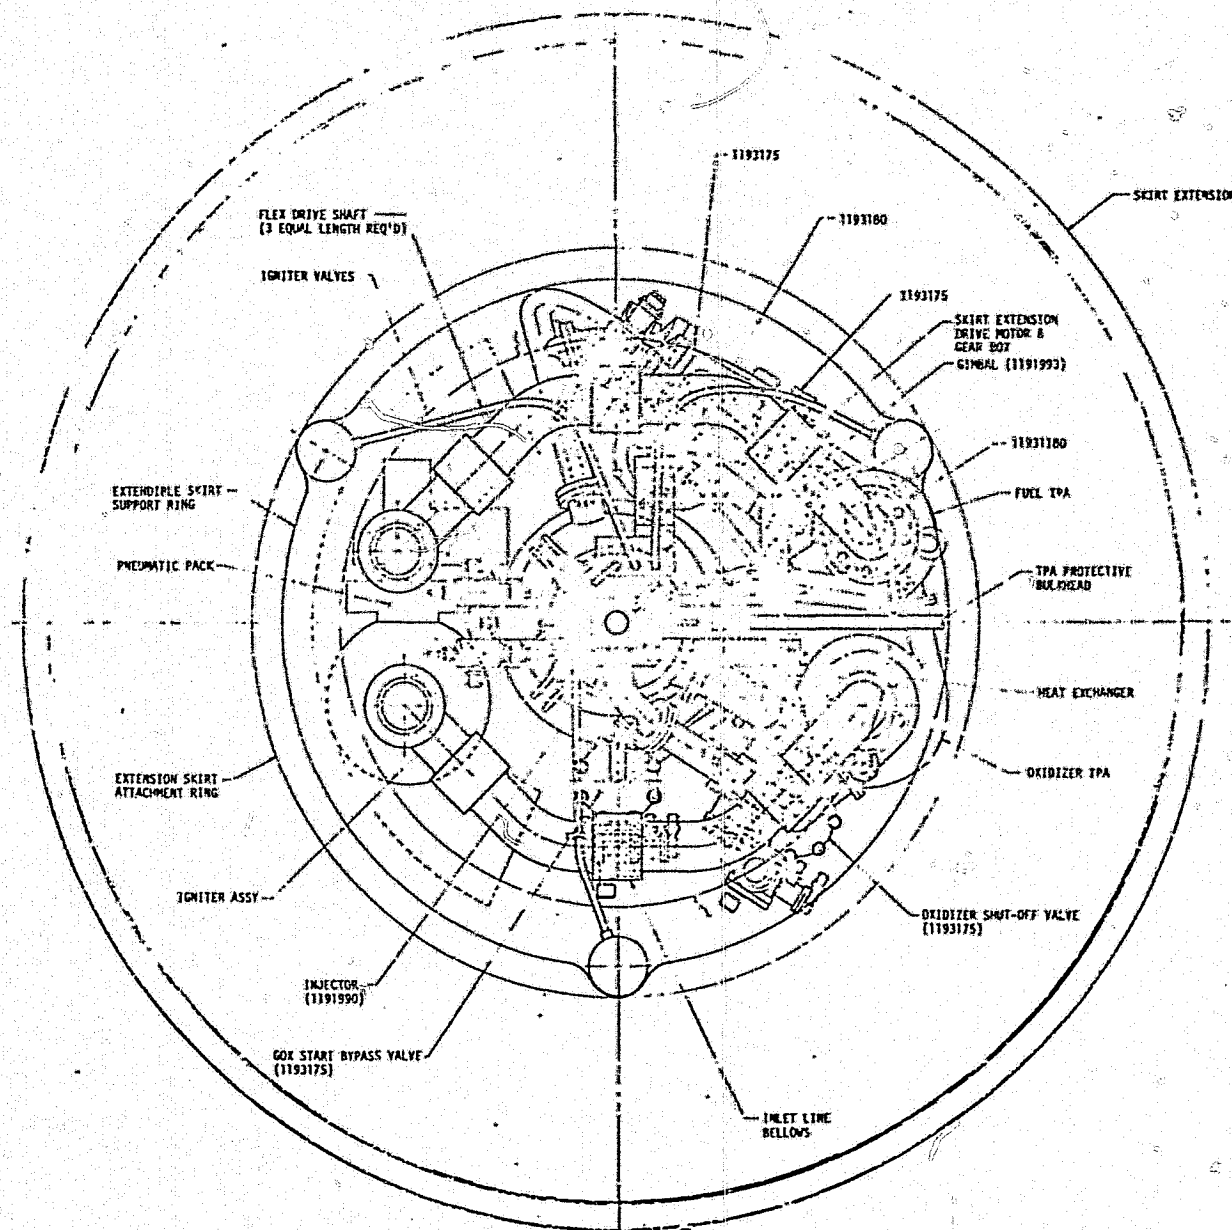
Engine Layout (ALRC Drawing No. 1193100) Sheet 1 of 3
